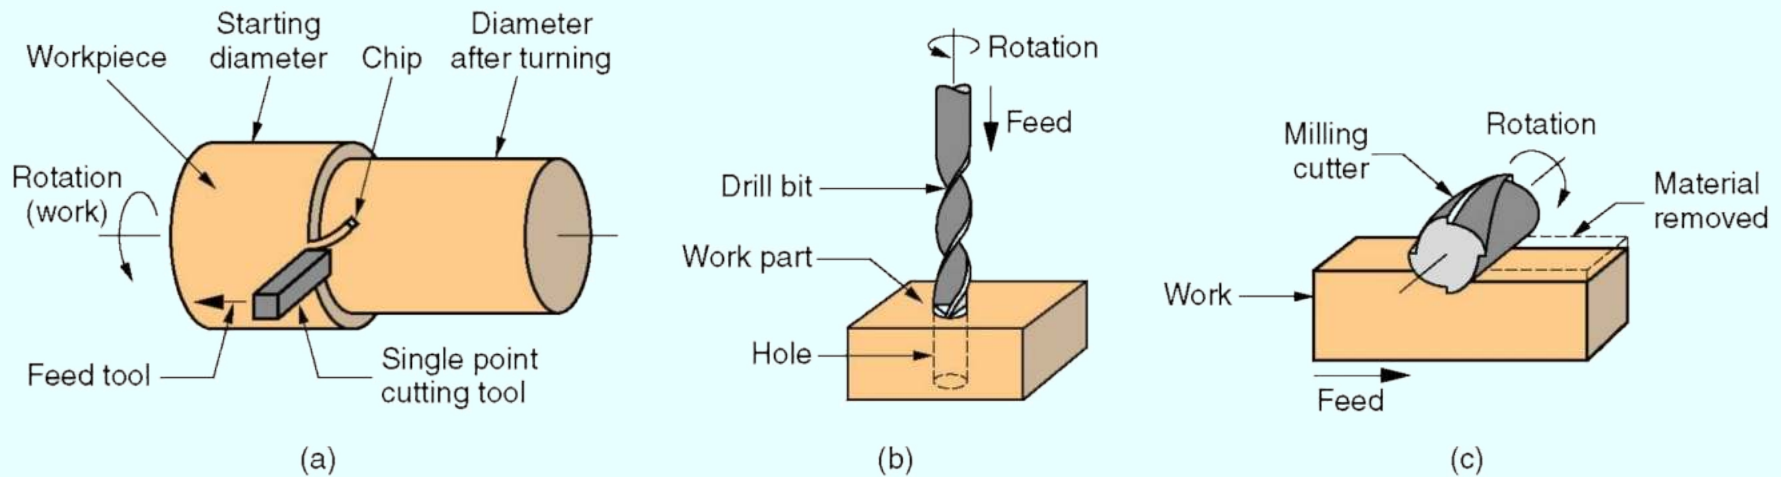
Common machining operations: (a) turning, (b) drilling, and (c) milling
